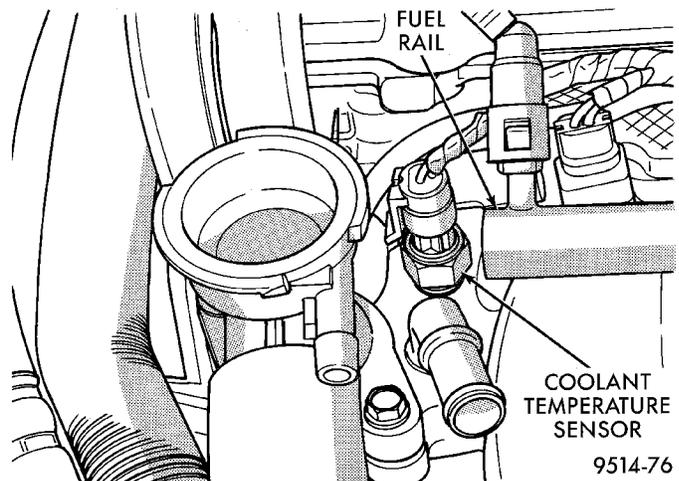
Engine Coolant Temperature Sensor—DOHC
